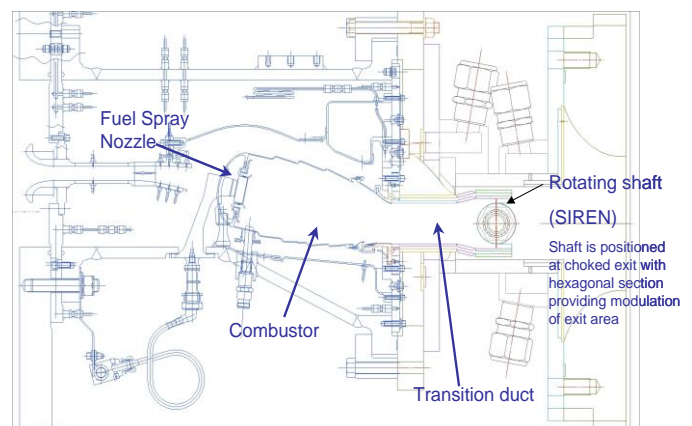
Section of Multi Sector combustion rig with hexagonal rotating shaft (SIREN) at choked exit.
